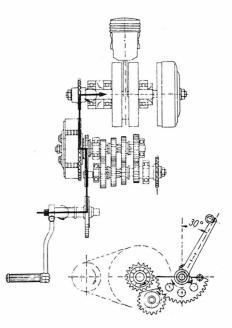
Cross sectional view of transmission and kickstarter installation.
